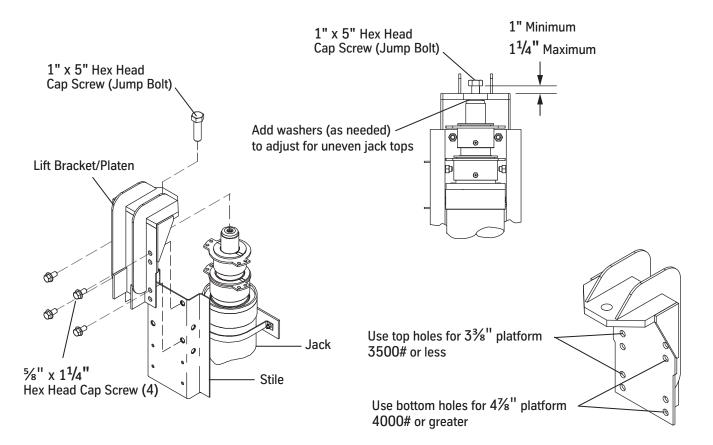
Lift Bracket/Platen Assembly Mounting on Stile and Jack
